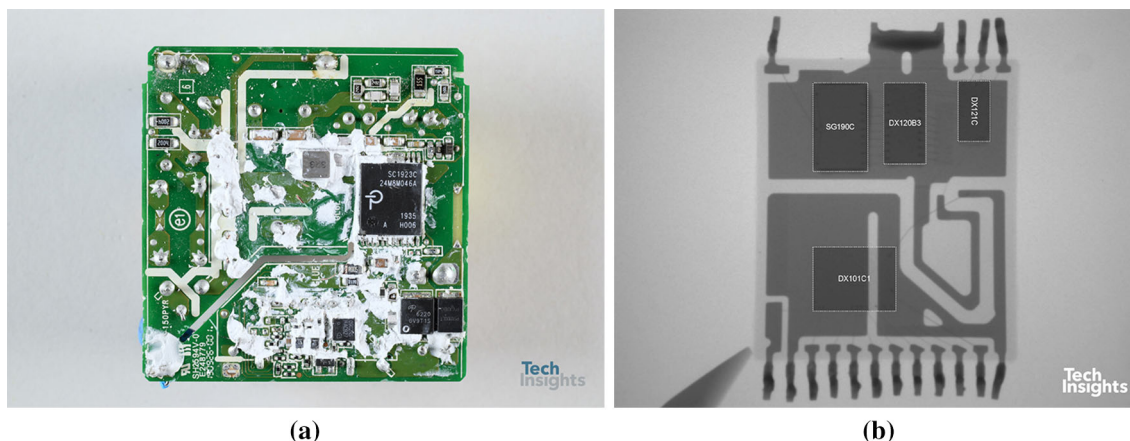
OPPO Reno Ace Super VOOC charger main PCB (a) and Power Integration SC1923C package x-ray view (b) after product teardown analysis © 2020 TechInsights Inc. Reprinted with permission
